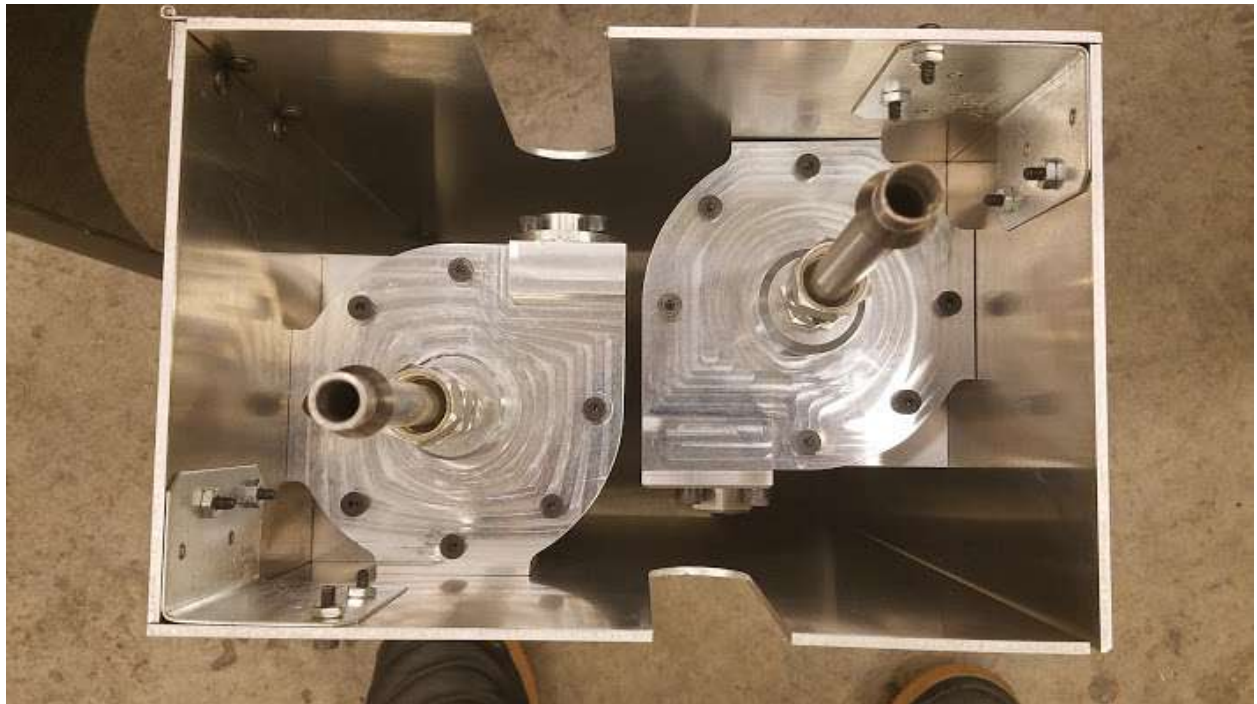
Full Assembly of IPA and LOX Pumps Mounted in Flight Orientation
